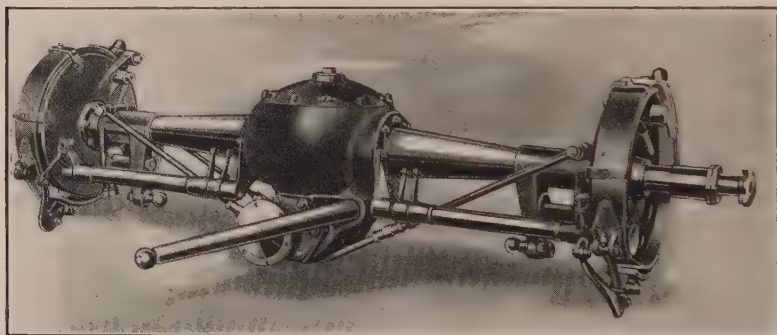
Willys-Knight worm-gear drive and rear axle.
